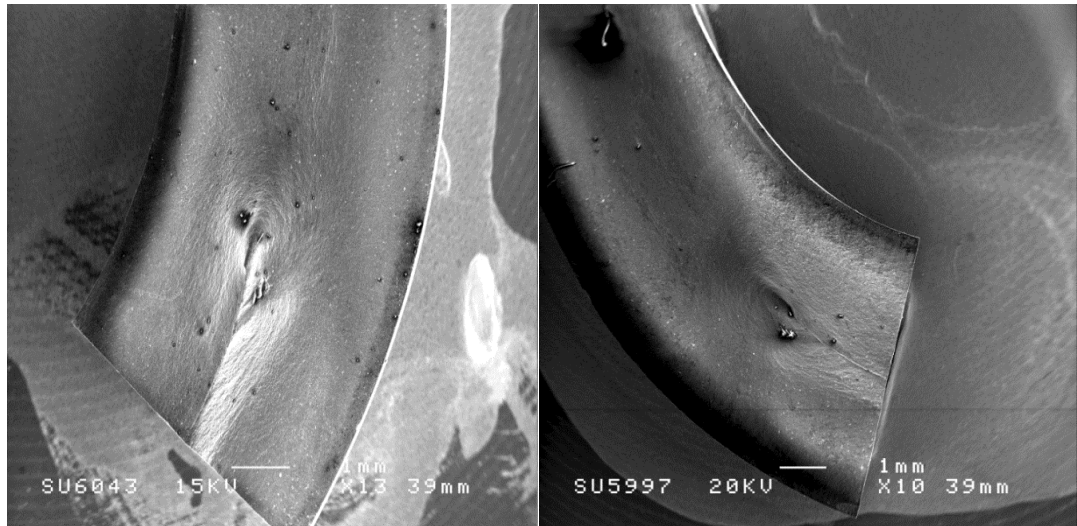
Fracture surfaces of O-ring tested in 70 % CO₂ in methane, displaying the top and bottom surfaces of the fracture.
